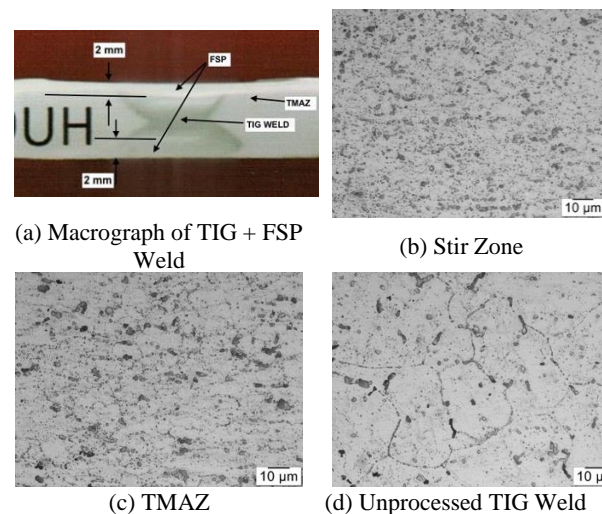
Macrograph and Microstructure of Autogenous TIG + FSP Weld at Different Locations: (a) Macrograph of TIG + FSP Weld; (b) Stir Zone; (c) TMAZ; (d) Unprocessed TIG Weld, Magnification 500x
